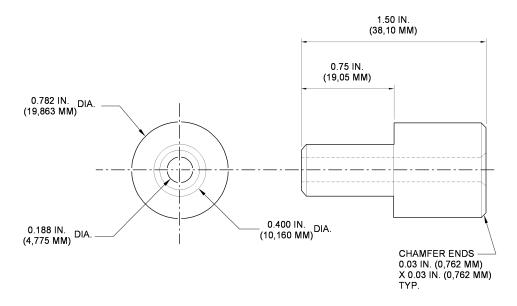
Armature Shaft Adapter, Anti-Drive End
